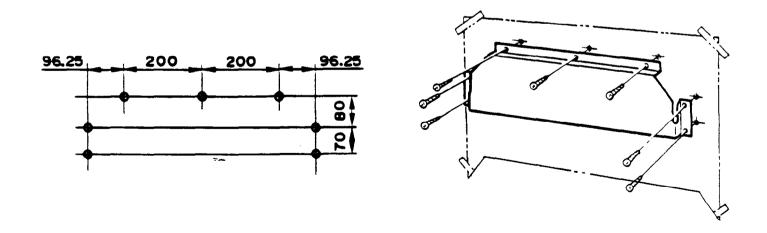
Attaching the Wall Mount Bracket of the Level II Advanced Expansion KSU to the Wall
